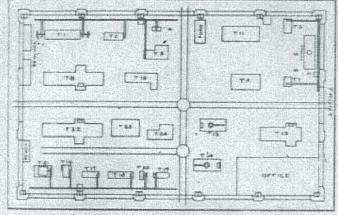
Plan and Tool Layout of Frog and Track Shop.
